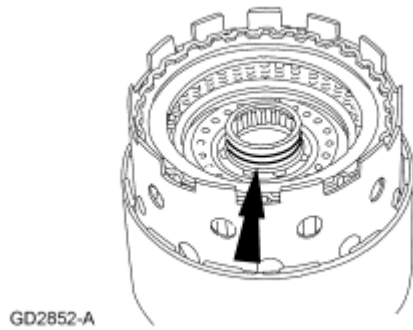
Forward/Coast/Direct Clutch Cylinder Hub Seal
